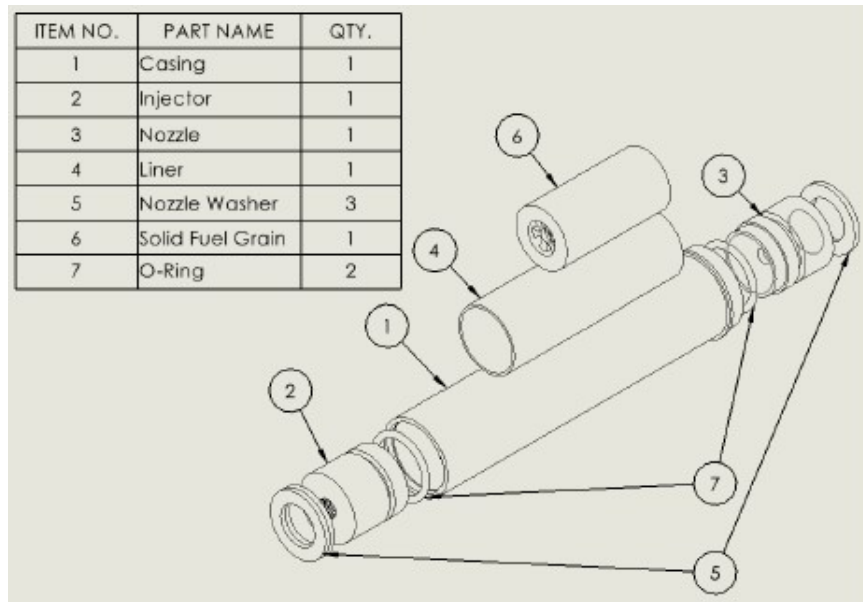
Exploded and Numbered View of Solid Fuel Assembly.
